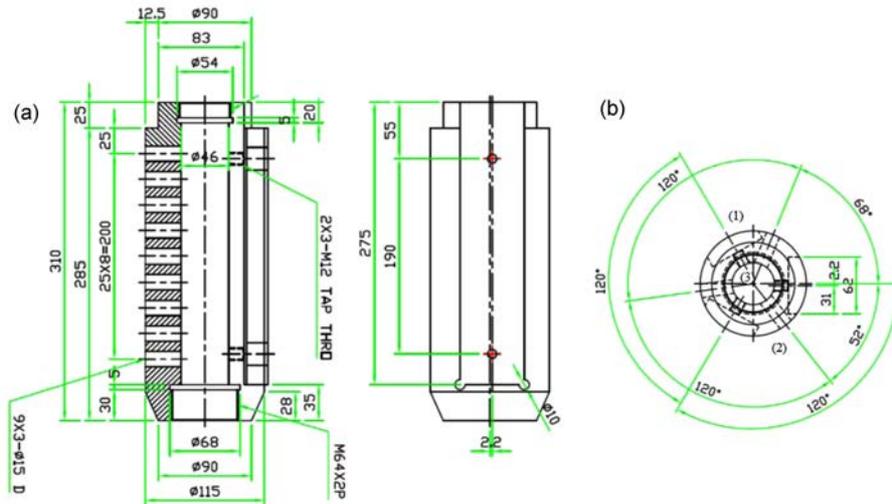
A schematic of a prototype of vertical rice miller for producing embryo-retaining polished rice: (a) side view, (b) top view. All dimensions are in mm.
